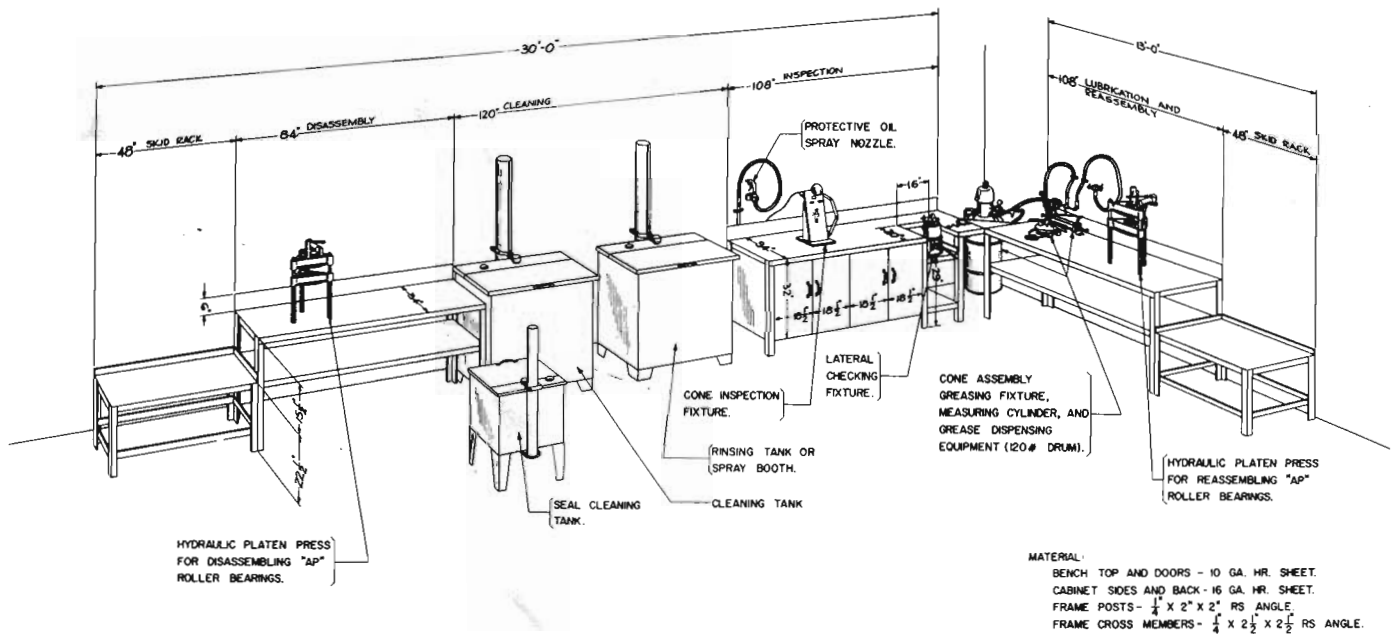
Typical Bench Layout Recommended by the AAR for Roller Bearing Maintenance.
